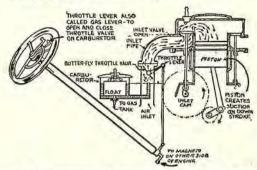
Illustrating the principle of opening and closing the throttle valve in the carburetor by the throttle lever on the steering wheel.
